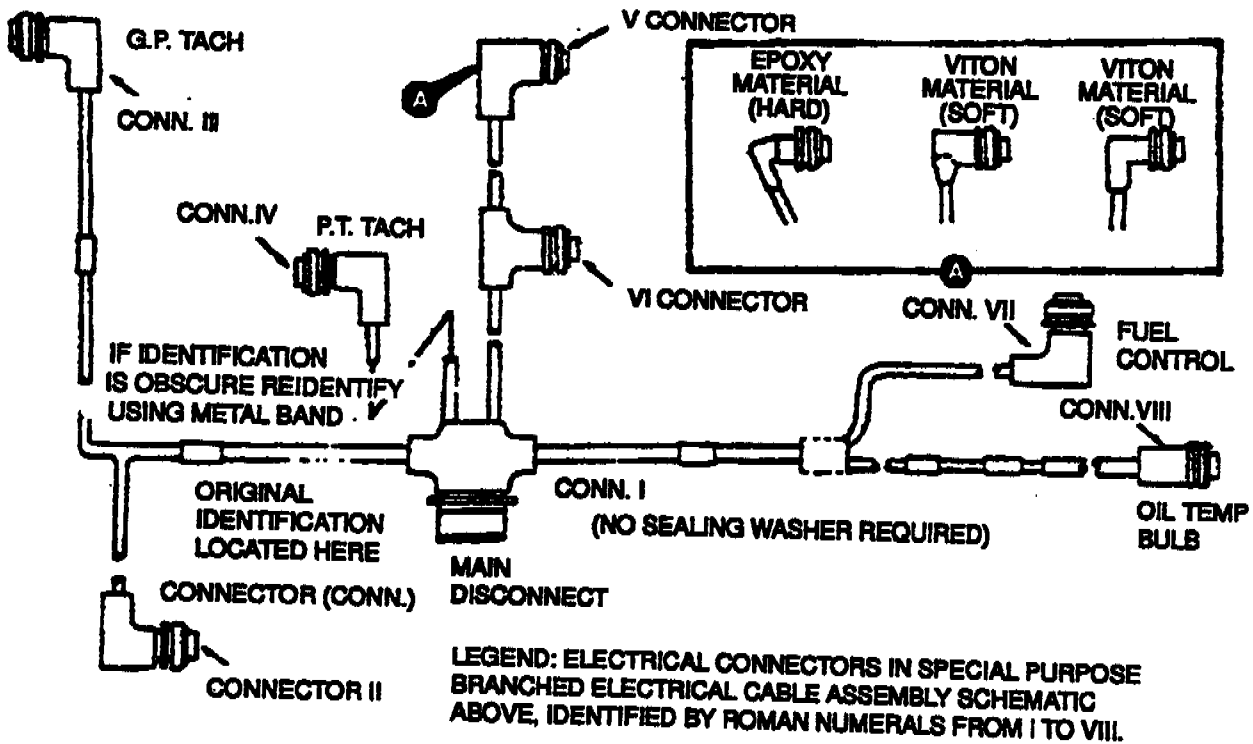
Identification of Electrical Cables (Sheet 1 of 2).
